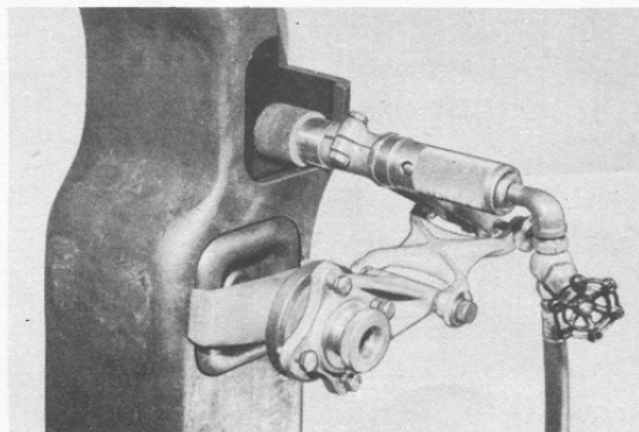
Air-driven handhole grinder as used on sinuous or square header.
